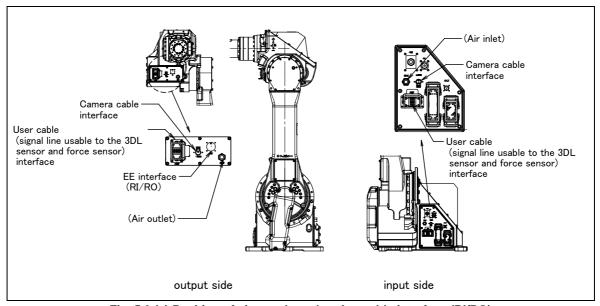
(e) Position of air supply and option cable interface (RI/RO) (When mechanical unit cable A05B-1125-H432 is specified)
